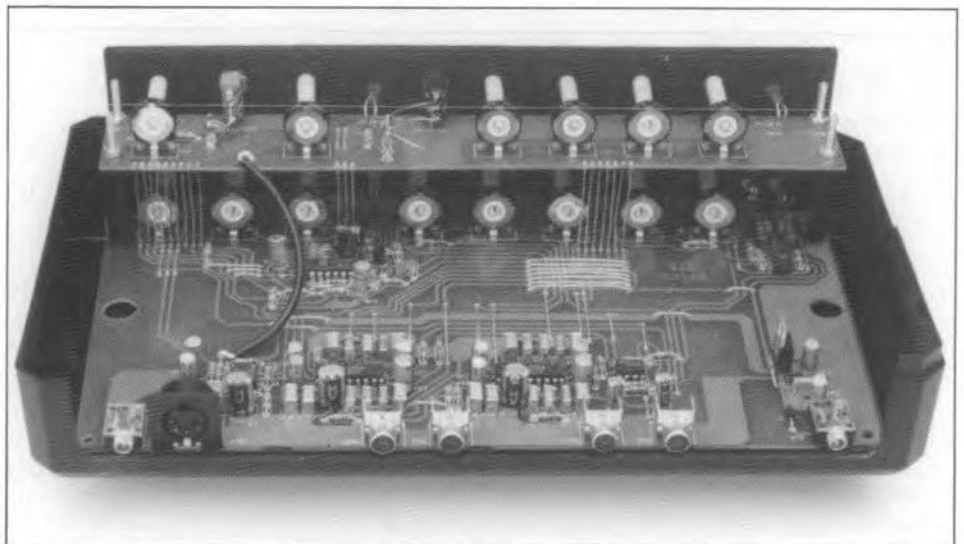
Inside view of the dubbing mixer with the rear panel removed. Note the vertical wires between the motherboard and the potentiometer board.
